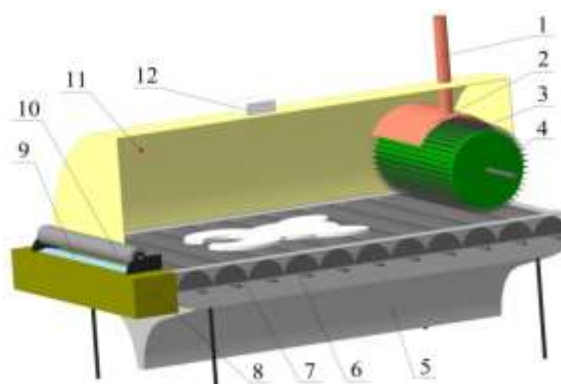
The device for the separation of fur from rabbit skin in UFEF: 1 - pneumatic conduit; 2 - dielectric umbrella; 3,4 - spiked drum for plucking; 5 - non-ferromagnetic pallet; 6 - roller conveyor of non-ferromagnetic material; 7 - the cover over the gears; 8 - bath for ferments; 9 - roller; 10 - pressure roller; 11 - semi-cylindrical
